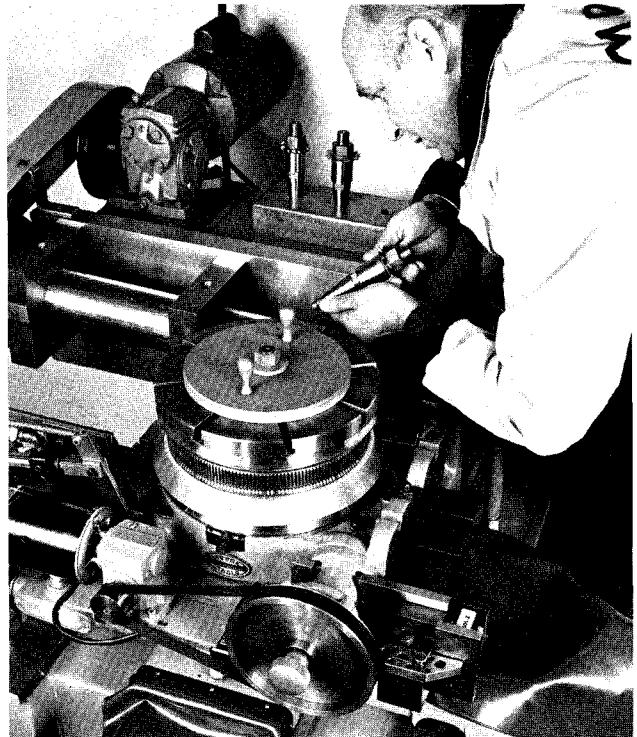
The rotary table gear is hobbed while rotating synchronously with a master rotary table on which it is mounted.
